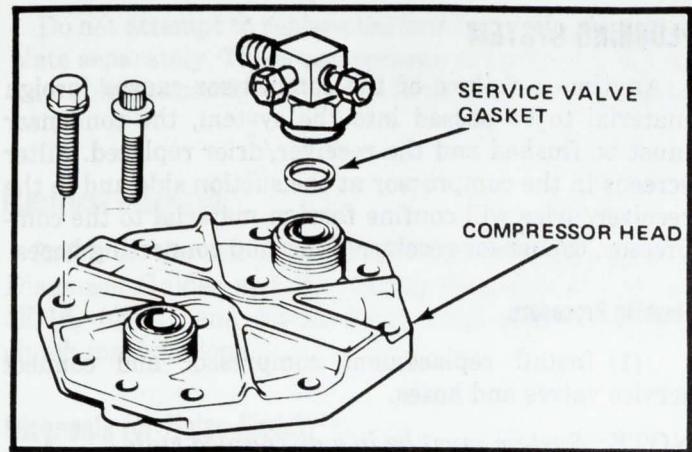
E-13 Head and Valve Plate Assembly Sequence 41501
